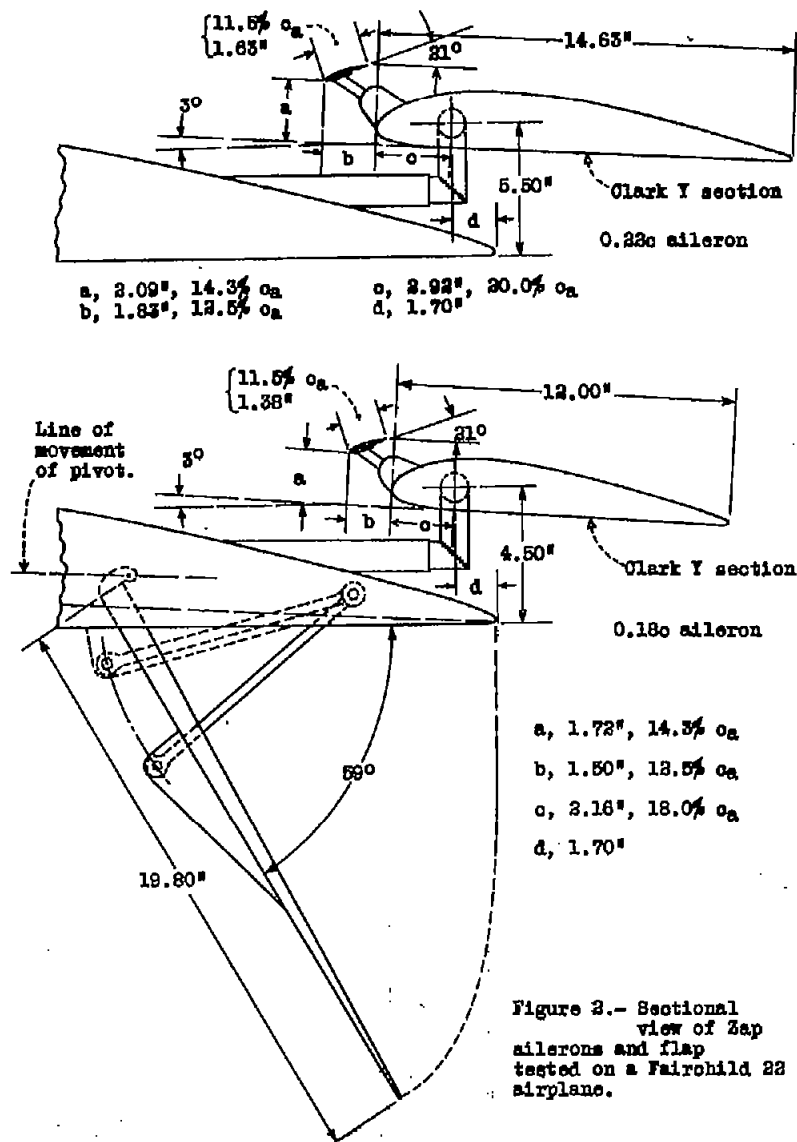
Sectional view of Zap ailerons and flap tested on a Fairchild 22 airplane.
